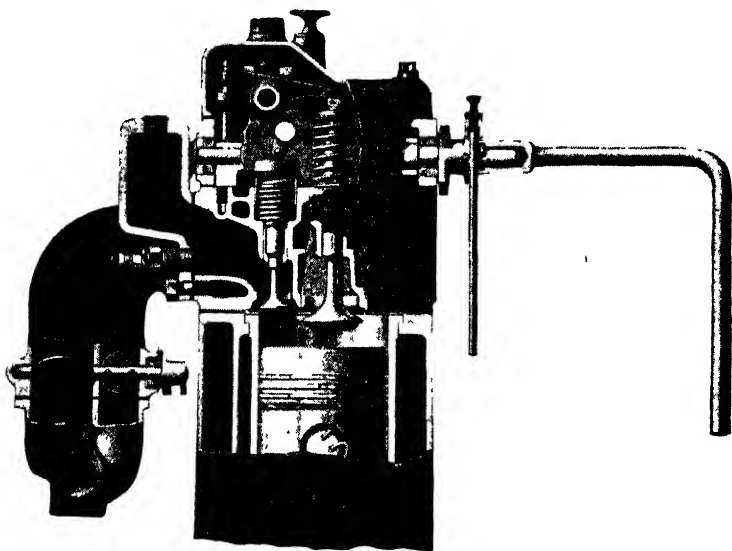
INTERNATIONAL HARVESTER TRACTOR ENGINE WHICH STARTS AS A GASOLINE ENGINE.
